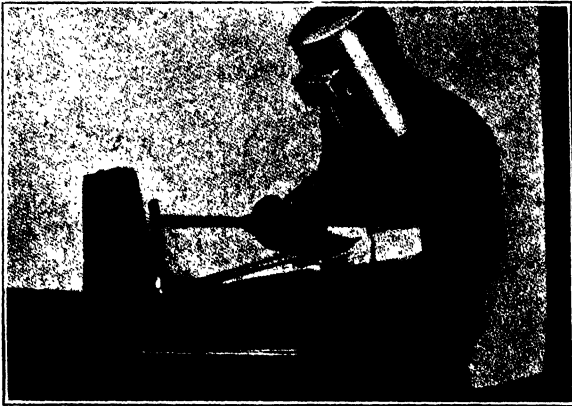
WELDER USING GRAPHITE ELECTRODE AND FILLING ROD.
